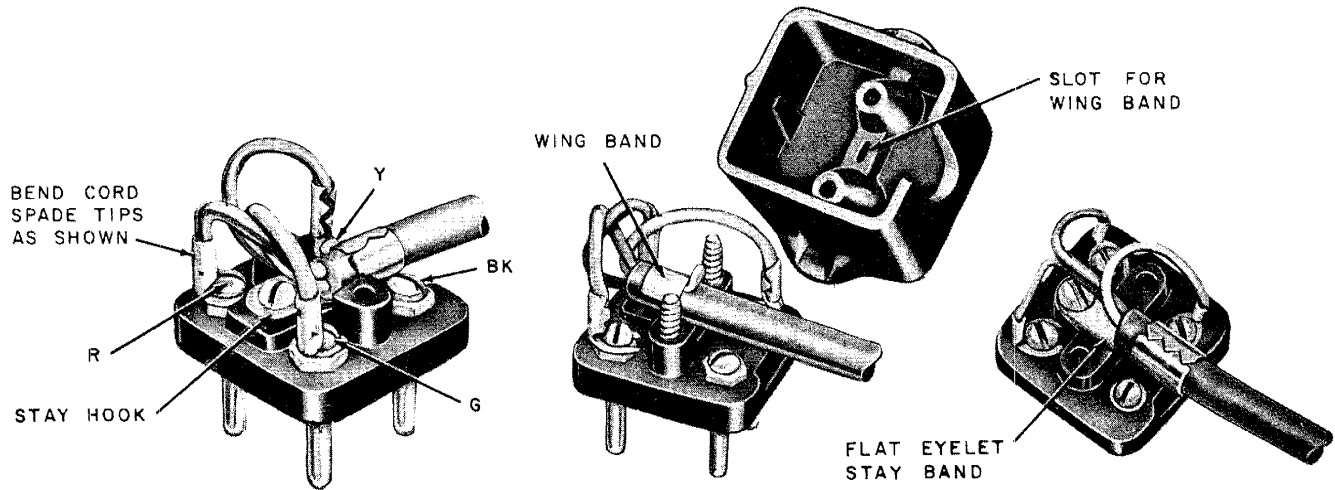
Terminating Cords Equipped With a Stay Hook, Wing Band or Flat Eyelet Stay Band on a 283B(MD) Plug
